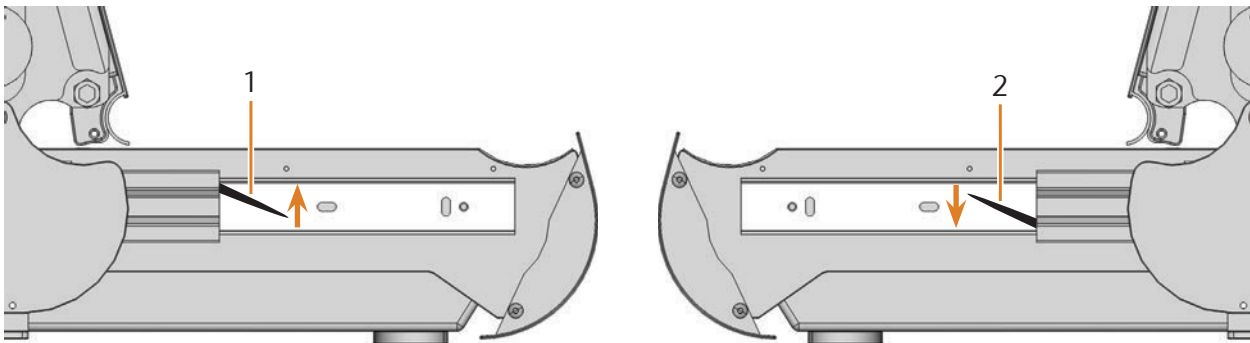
LOCKING LEVERS AT THE SIDES OF THE COOLING LIQUID TANK
